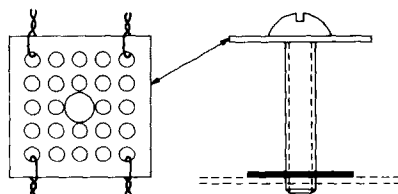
Details of pulse-transformer core, which is a piece of 0.6 x 0.6-inch (15x15mm) perf board with 0.1-inch (2.5mm) hole spacing. Mounting screw should be nonmagnetic.
